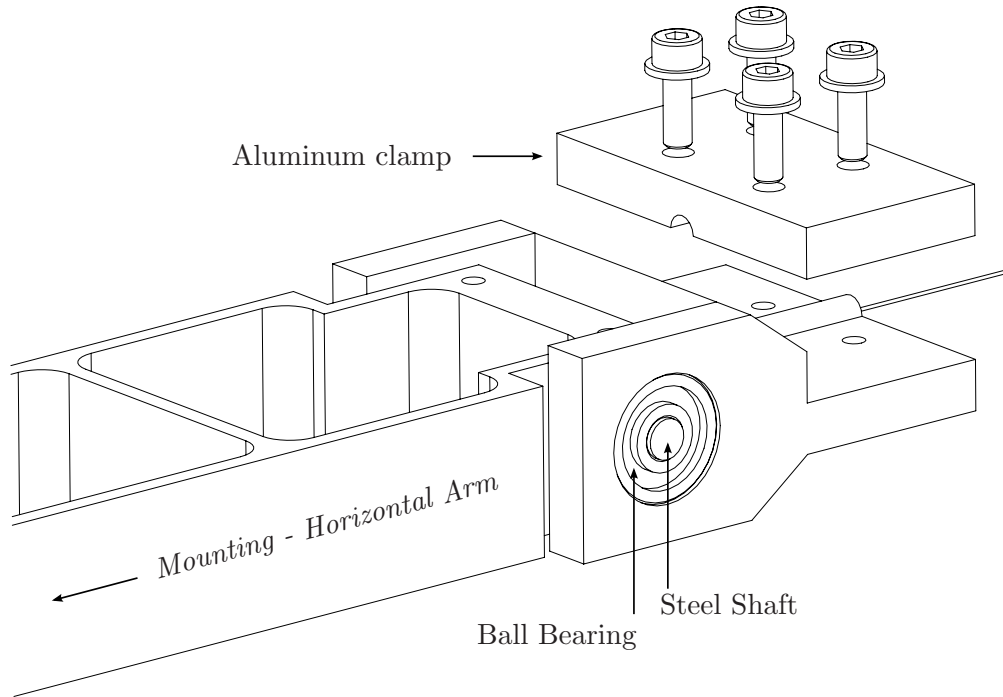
The mechanical interface to horizontal arm, is constructed to work as a self-balancer, by mounting the horizontal arm some 13 cm below a ball bearing joint.
